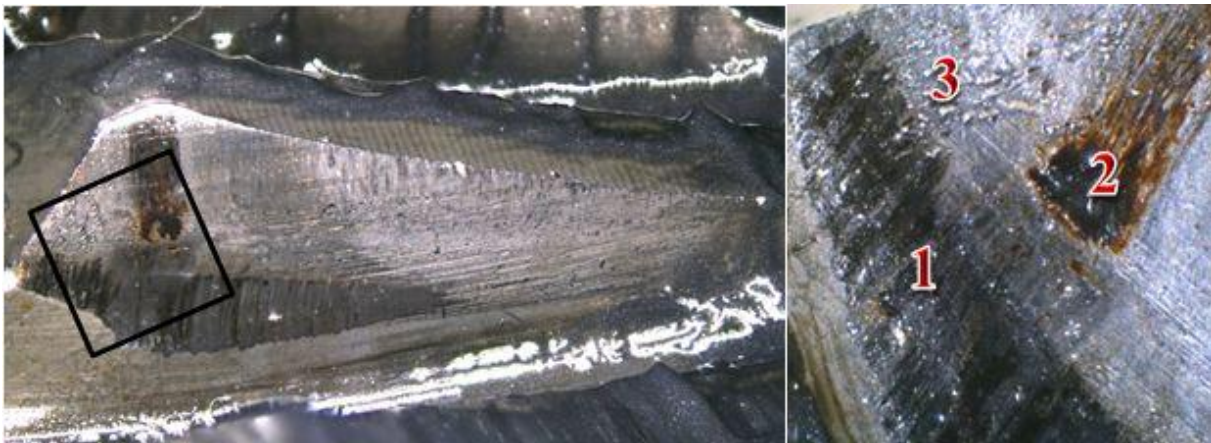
Gear tooth after first step of *Pretest I* (3 PoL, 50 Nm and 30 rpm)
